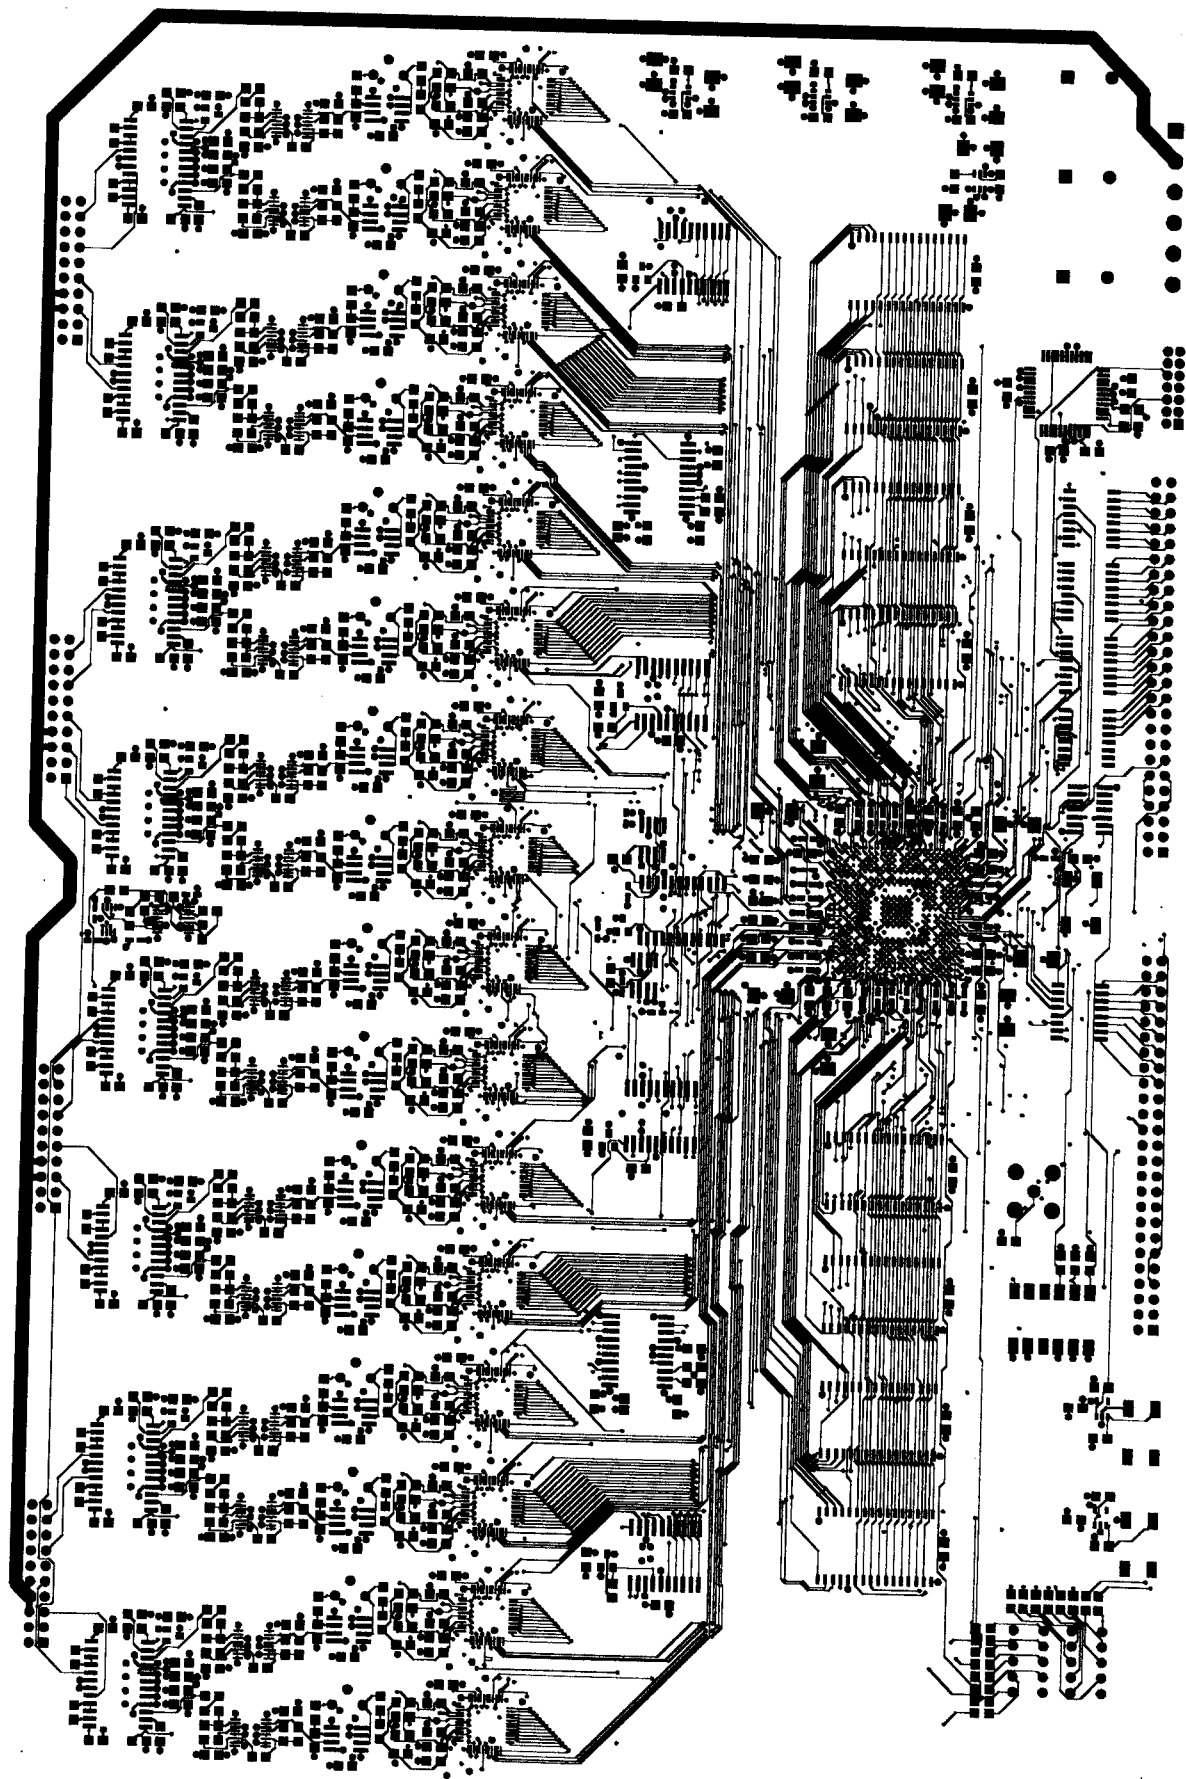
Main Board, PCB Top Layer Gerber Drawing
